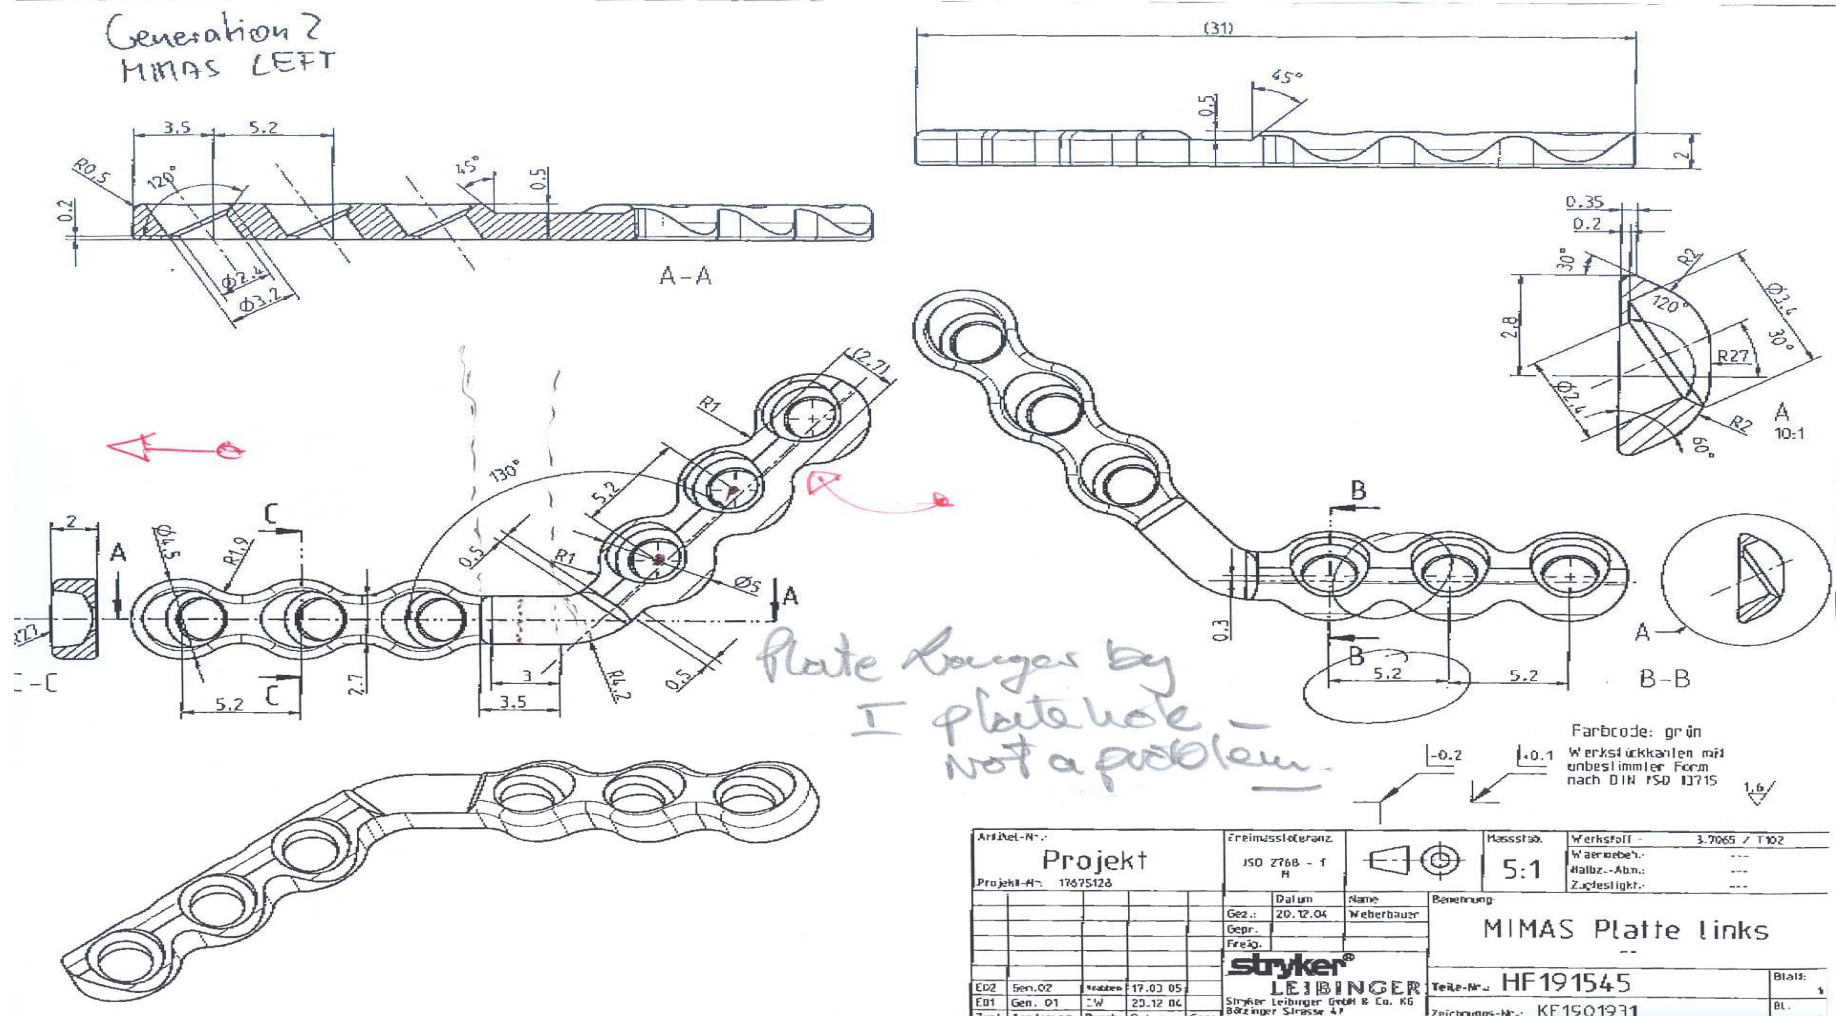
Design sketches for angle screw holes in L-shaped (ISI) mini-plates
